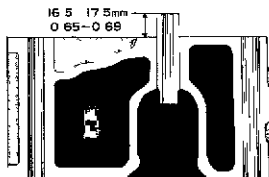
11 Valve Stem Guide X4932 Extrusion (Intake)
